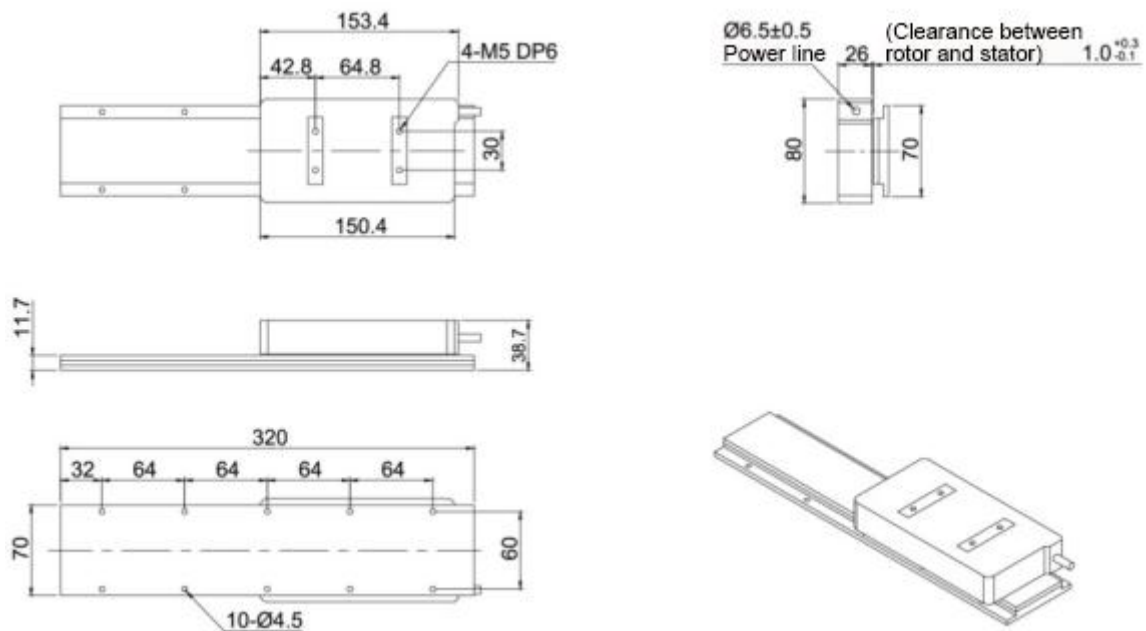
Dimensional drawing of WZCR-AZ70C2-□ motor
